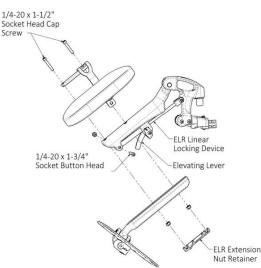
Elevating Legrest Footrest Height Adjustment
